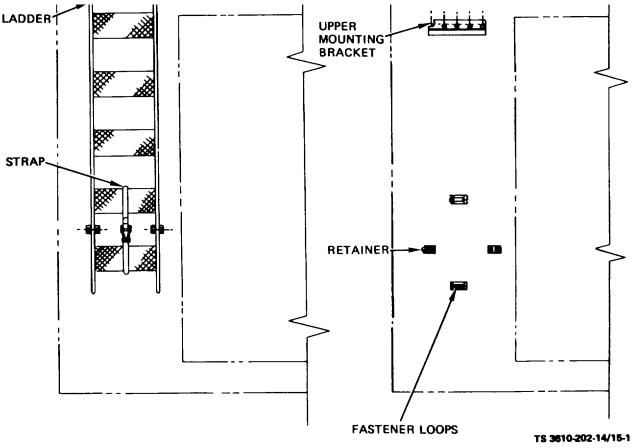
Ladder Assembly Holddown, Removal and Installation
